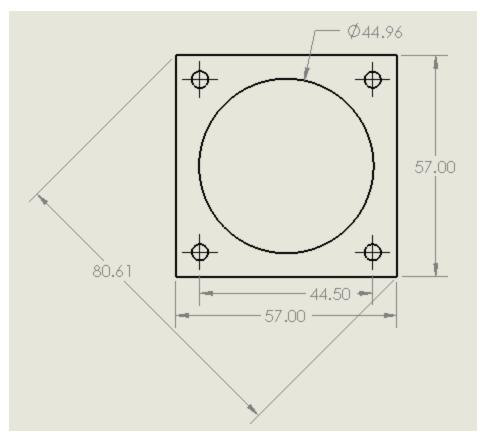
Shell size 32 wall mounted receptacle dimensions, all dimensions in mm
